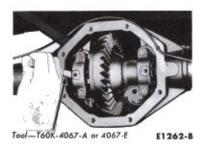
Backlash and Bearing Pre-Load Adjustment
